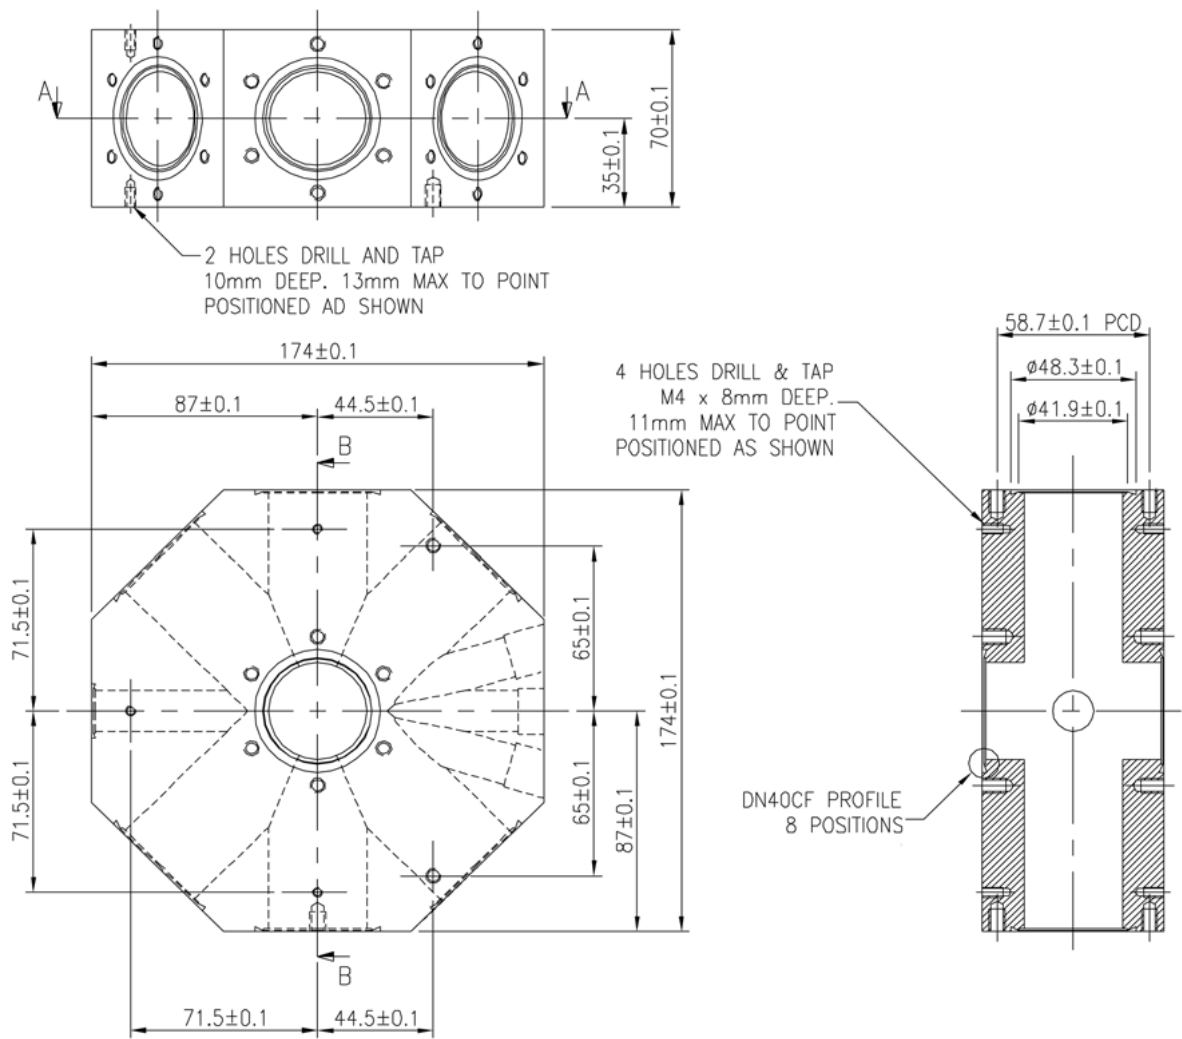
Octagonal MOT chamber (dimensions in millimeters).
